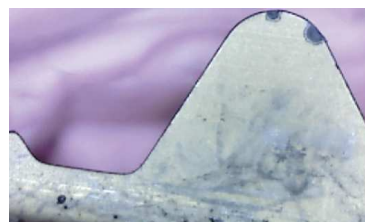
Photo of cutting part of carbide insert of tool for turning of tool joint tapered thread Form IV (executed at 20-fold increase)
